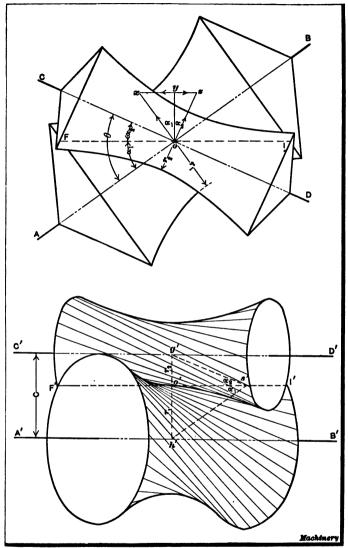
Pitch Surfaces of Skew Bevel Gears showing Rectilinear Elements of Engagement
